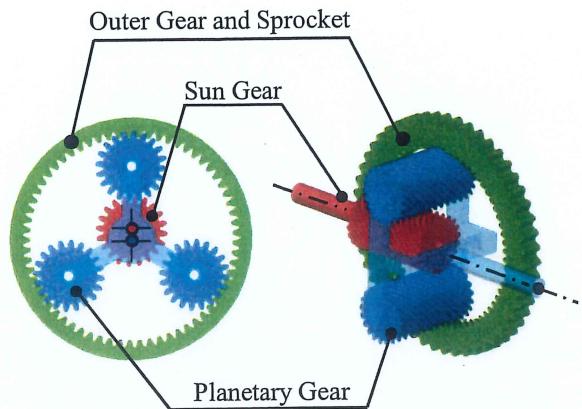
Basic Concept of Eccentric Planetary Gear Mechanism
